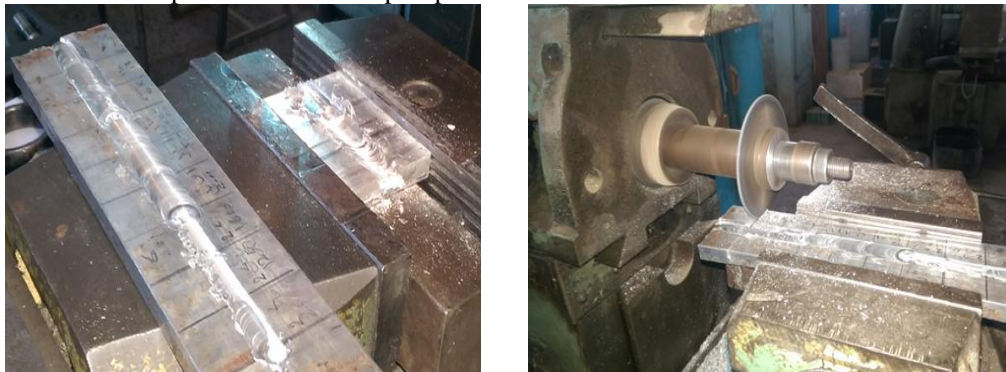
(Lef - aluminum plates after the FSW process; Right - cutting the plates to provide more samples
